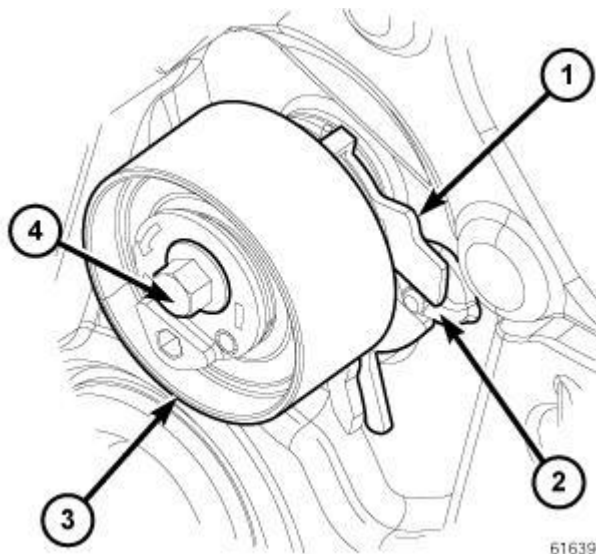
Timing Belt Tensioner, Alignment Plate, Engine Cover Boss & Bolt
